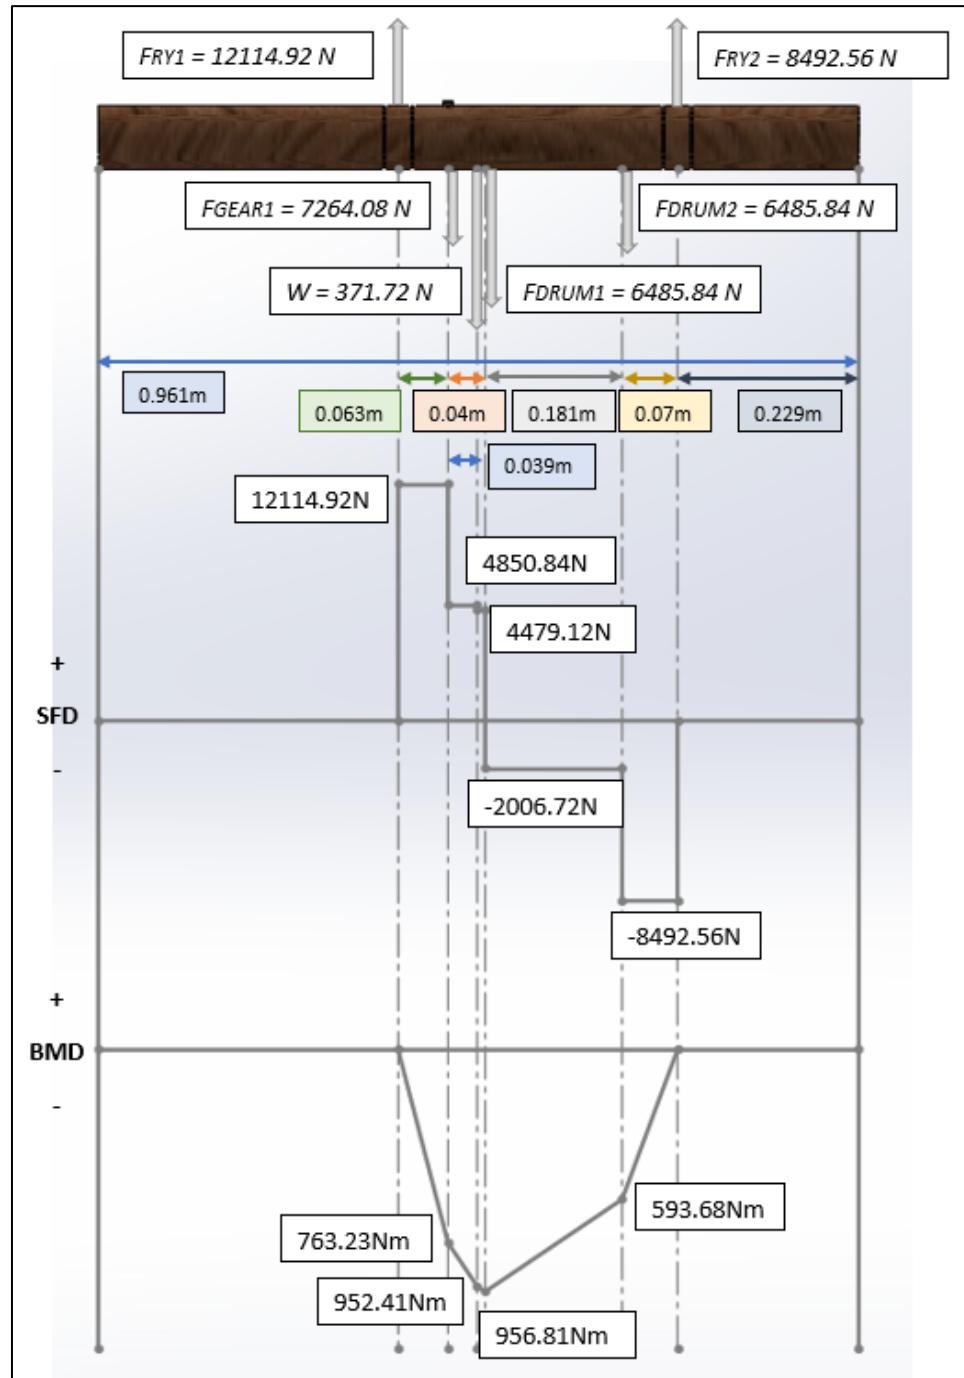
Shear Force & Bending Moment Diagrams of Initially Designed Pulley Driving Shaft
